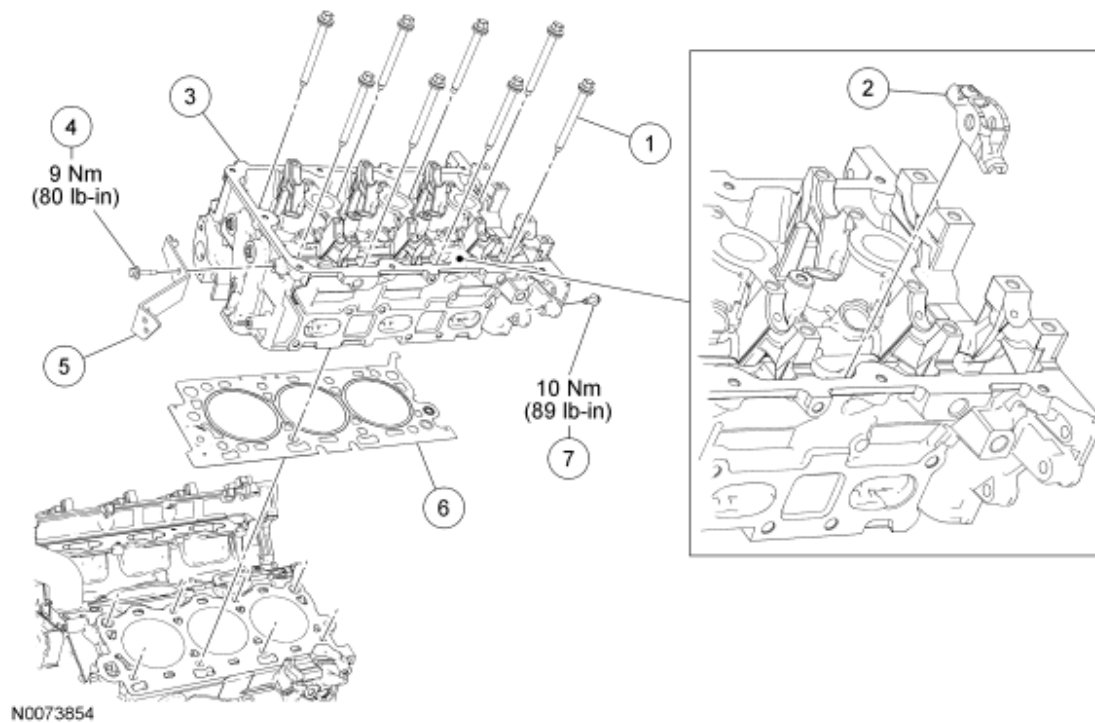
Exploded View Of Cylinder Head With Torque Specifications - RH
